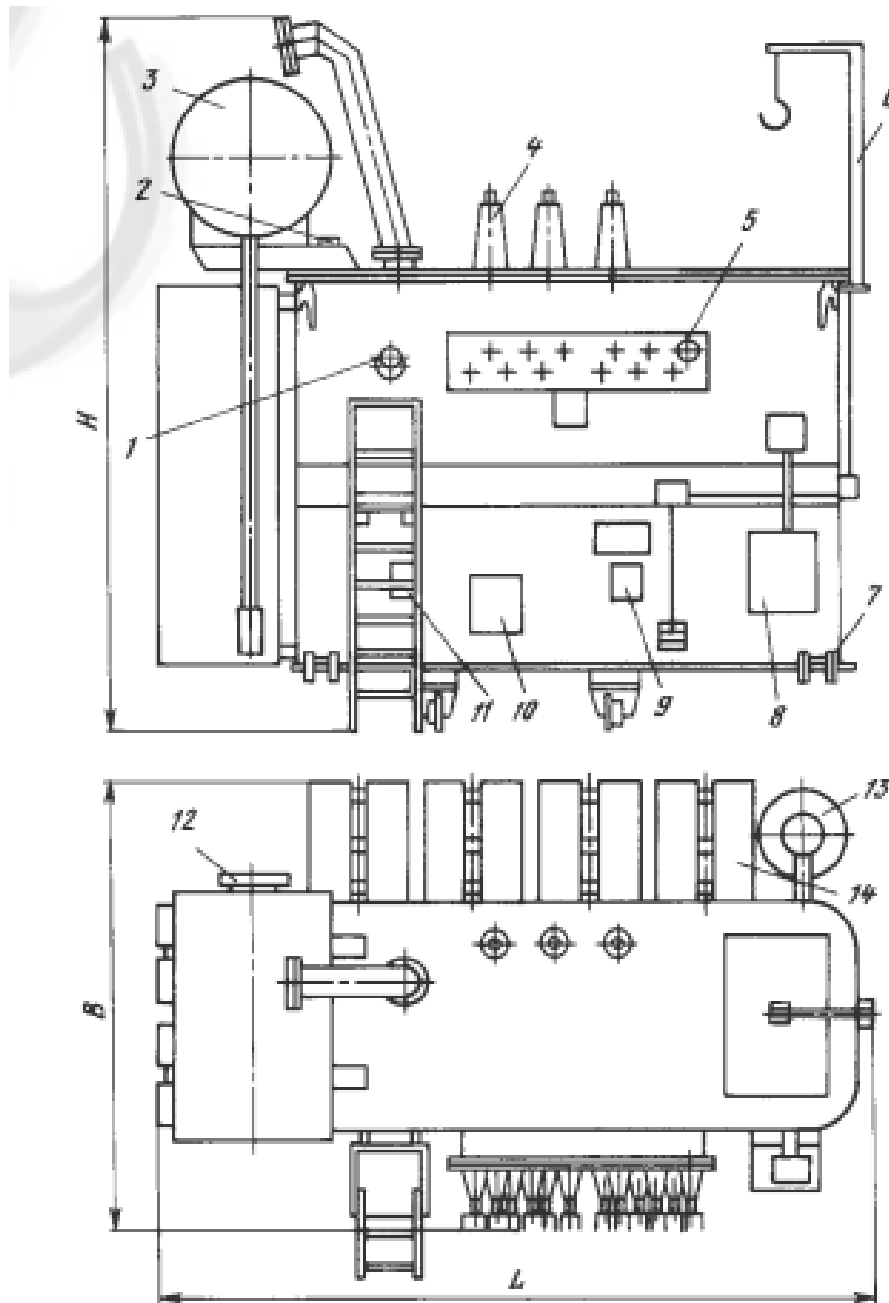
General view and overall dimensions of transformers of the TDNP series
